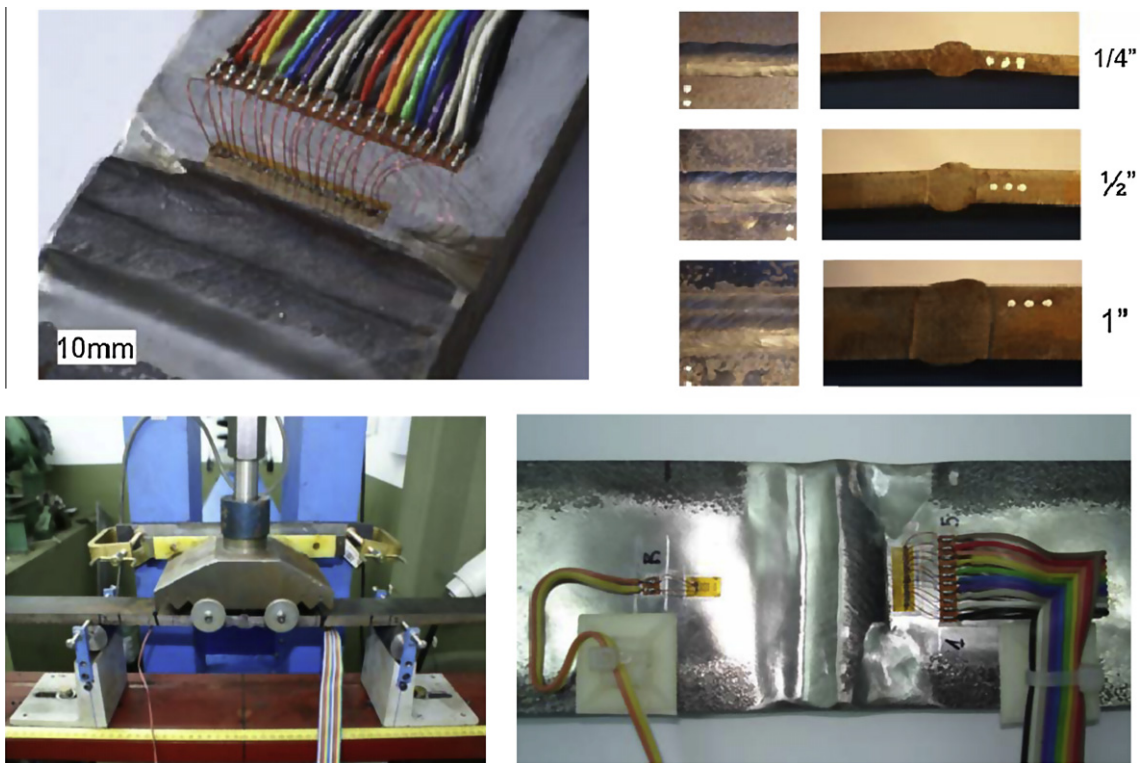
Photographs showing details of the instrumented specimens and testing configuration.
